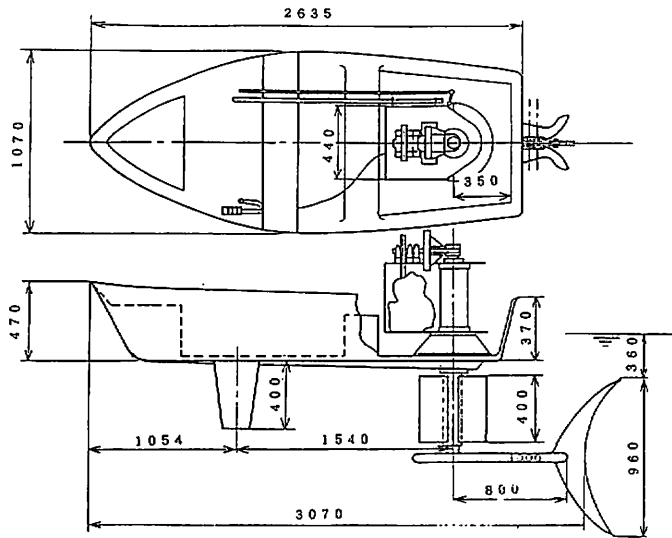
Oscillating wing propulsive ship with motorbike engine
